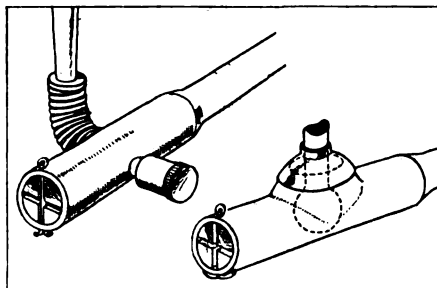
Left—Suggested type of joint with a short piece of flexible metallic tubing for holding grease or oil
